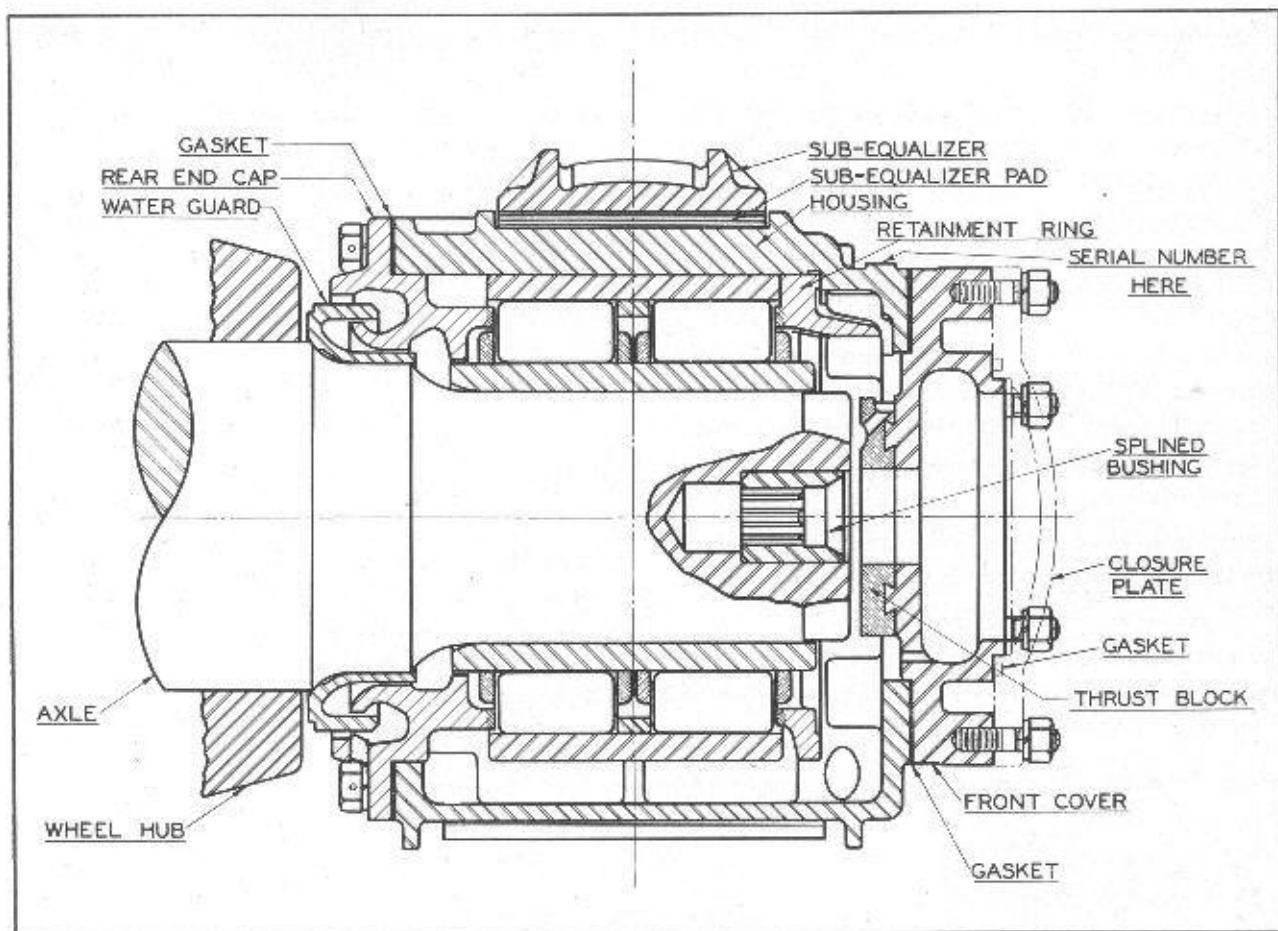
Cross section of the type JM Hyatt Roller Bearing Journal Box (Combination).
